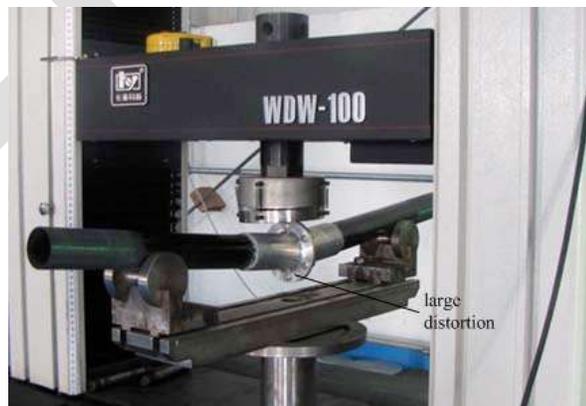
Deform of the aviation aluminum alloy flange by the bending test.
